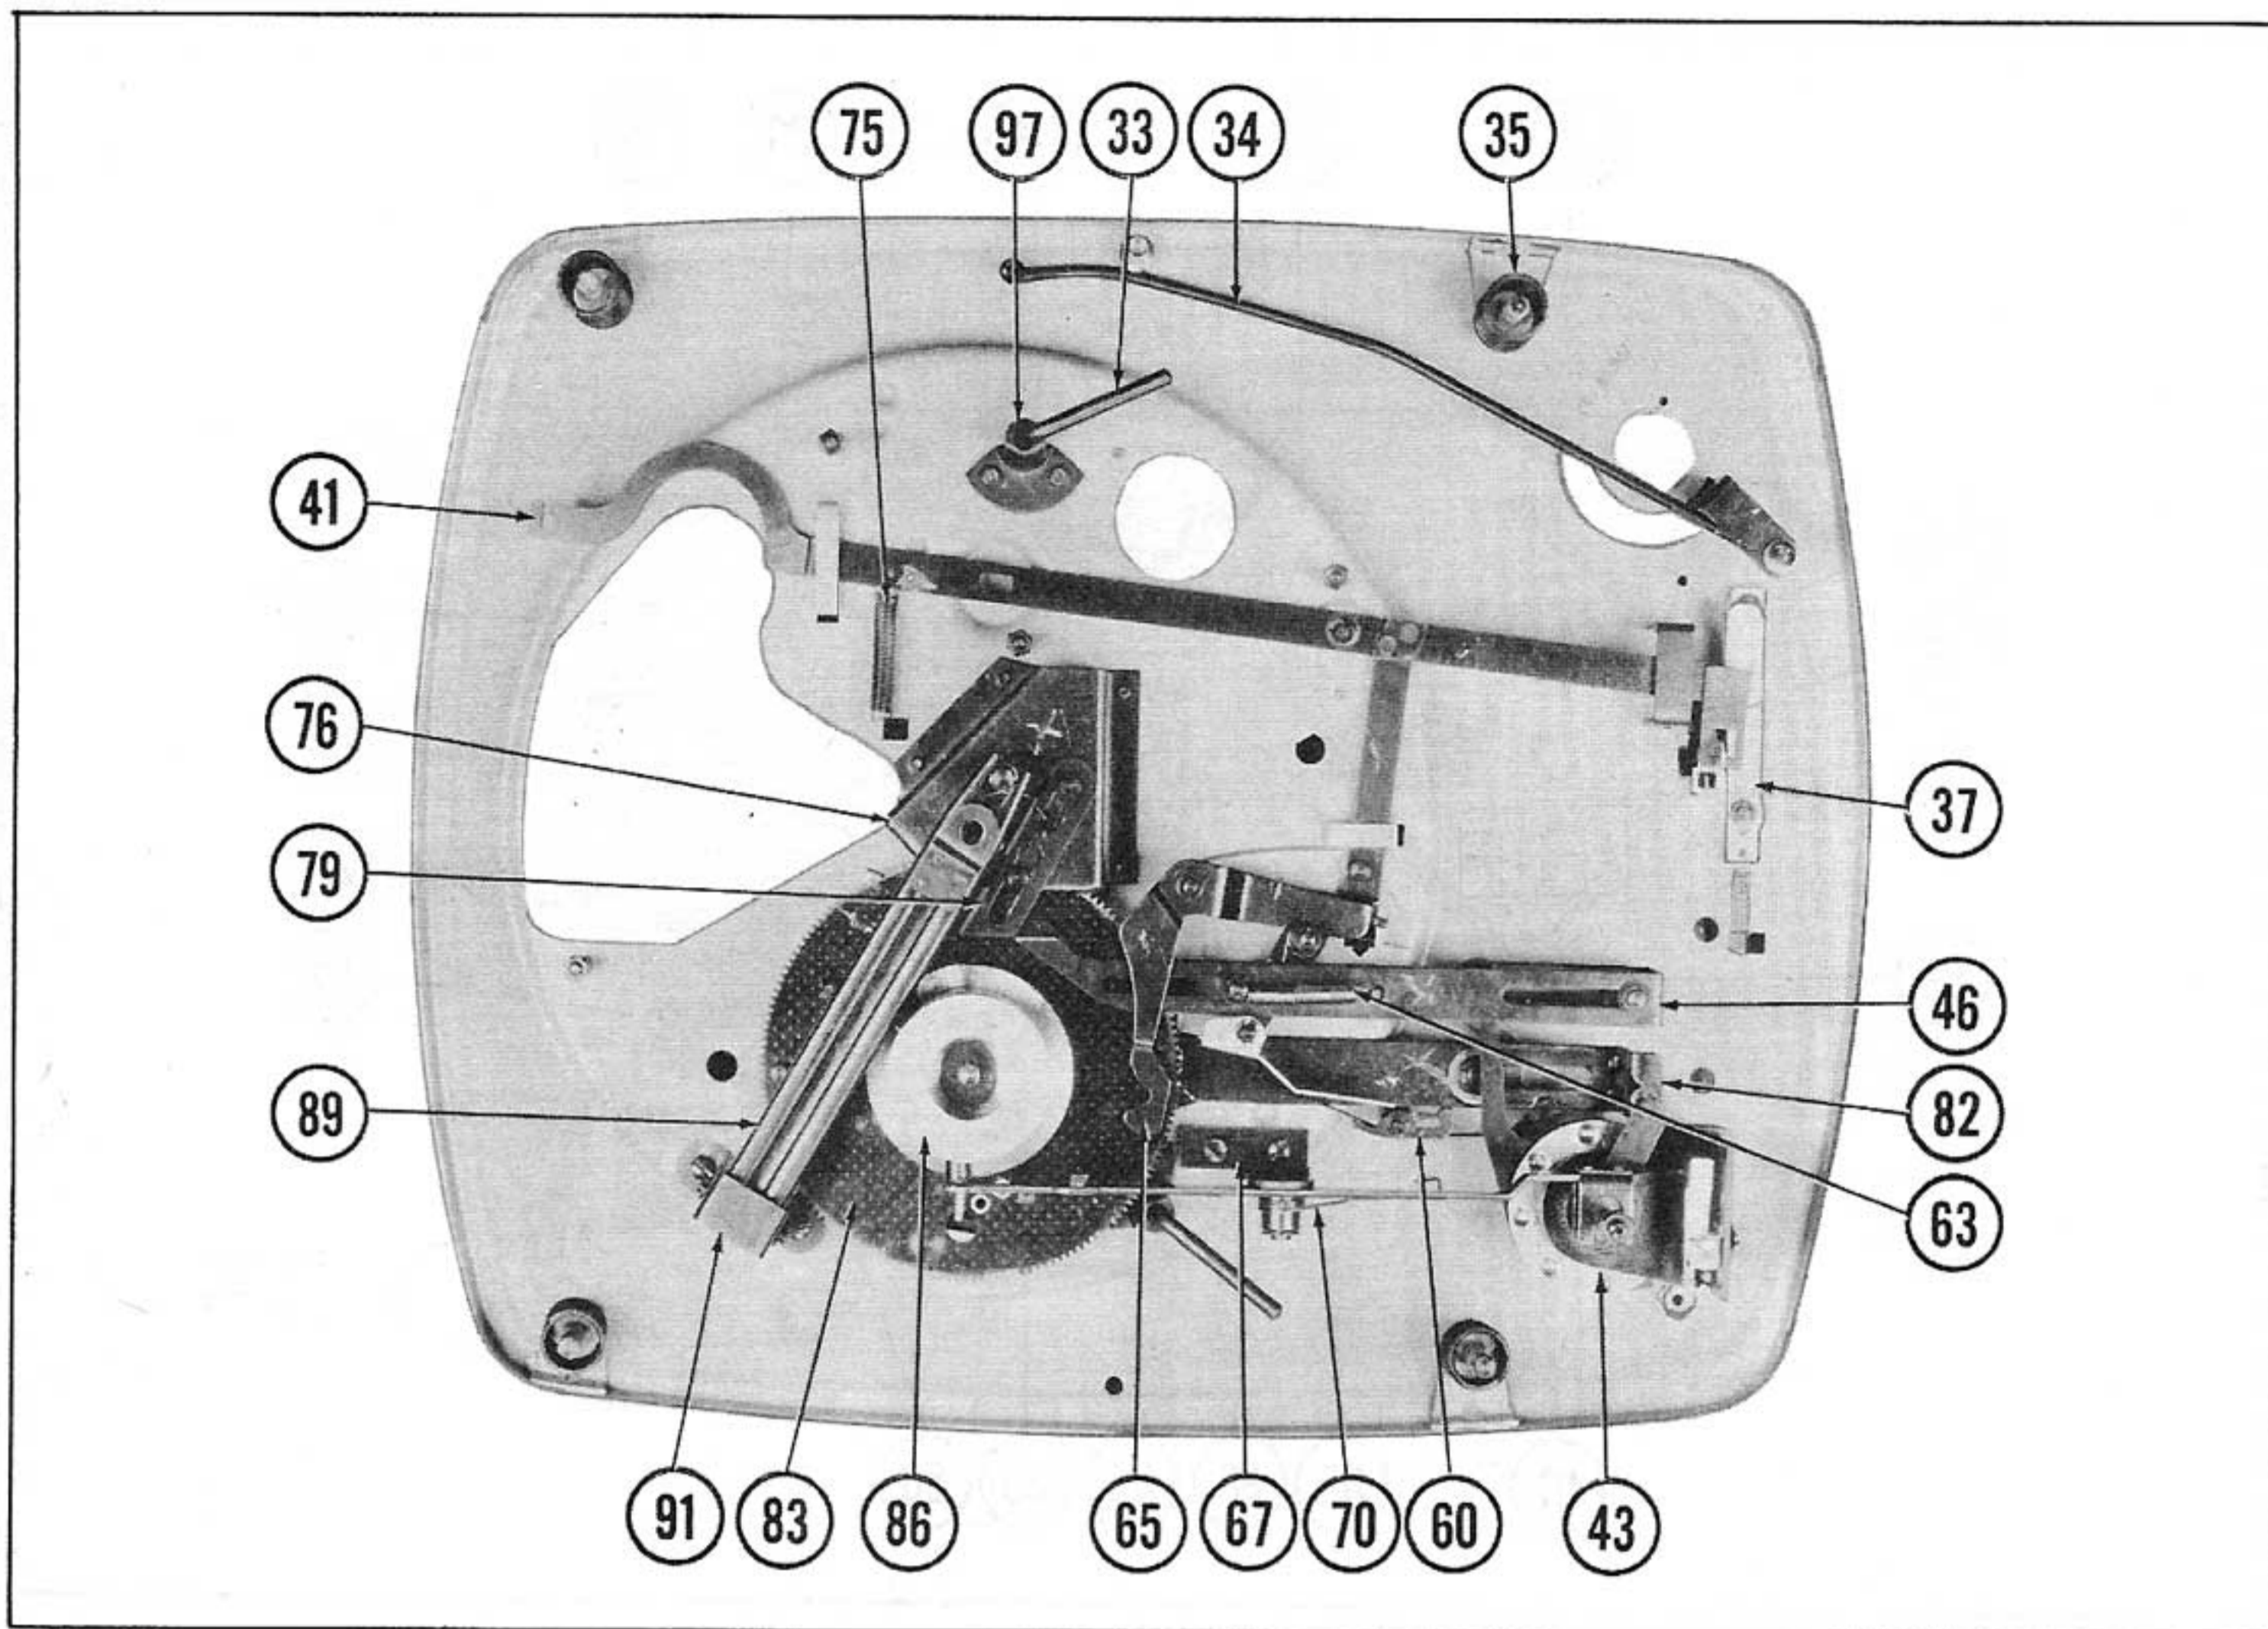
BOTTOM VIEW OF CHANGER WITH MOTOR REMOVED
